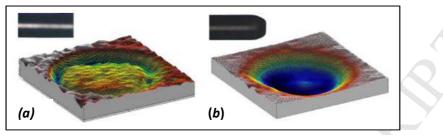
(a) Machined surface when using flat-bottom electrode. (b) Machined surface with spherical-bottom electrode. [96]
